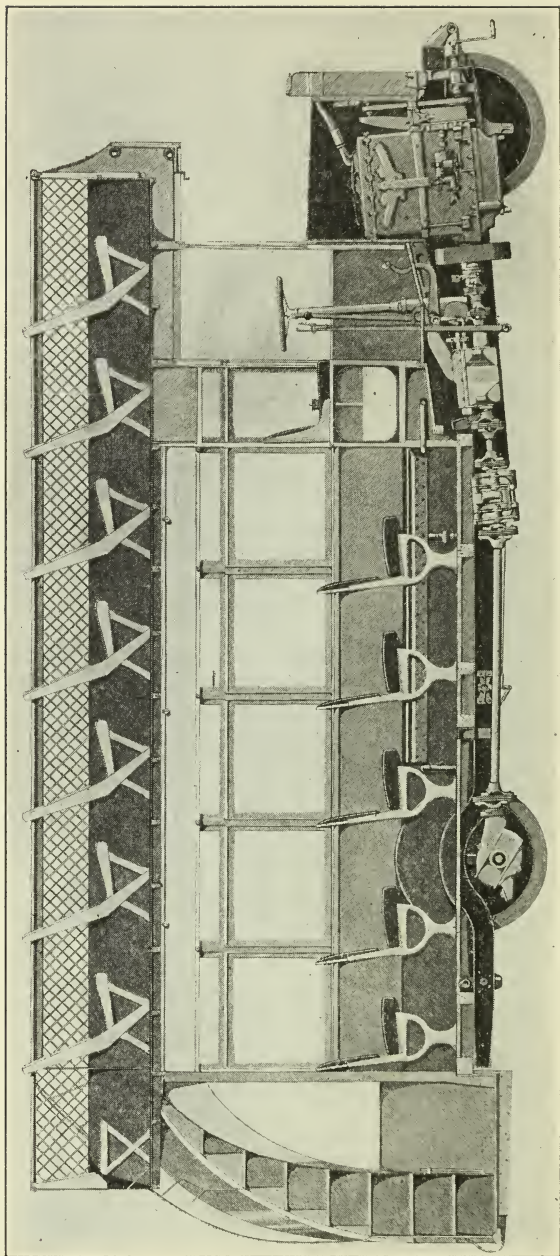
SECTIONAL VIEW OF THE TYPE-L BUS
